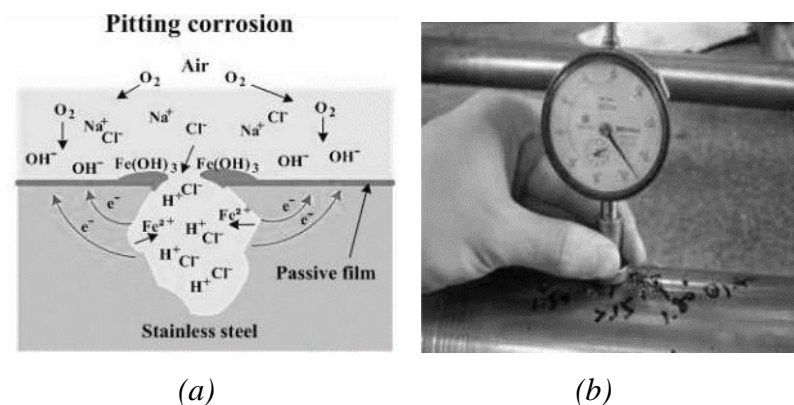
Pitting corrosion, (a) pitting corrosion deep growth, (b) Measuring depth of pitting deep. [88]
